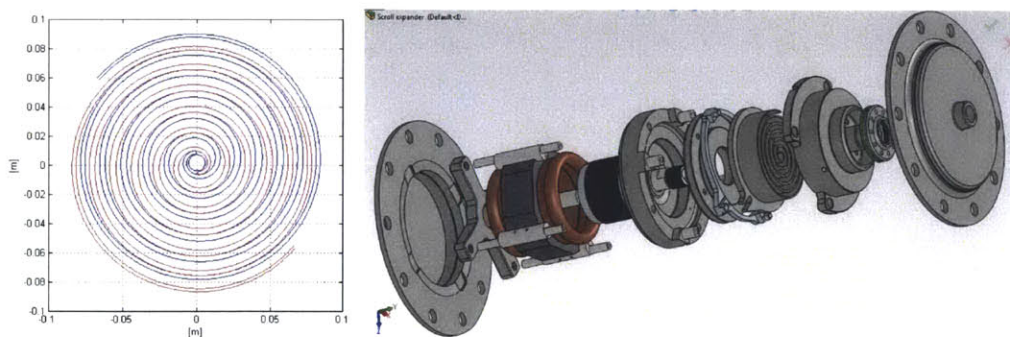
Selected geometry for a scroll expander of volume ratio 8.5 maximizing the compactness factor (left), and an exploded view of a CAD model for a prototype scroll expander (right)
